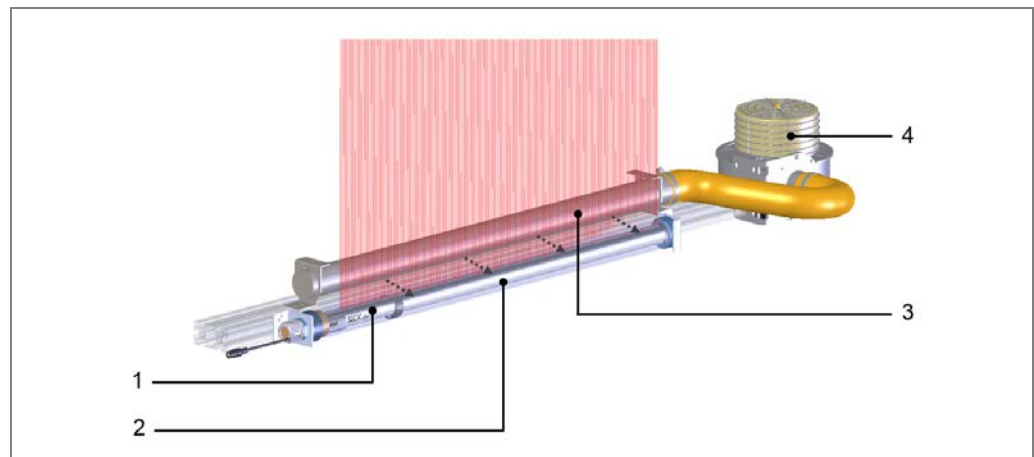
IPG2 protective pipe with sender and cleaning unit
